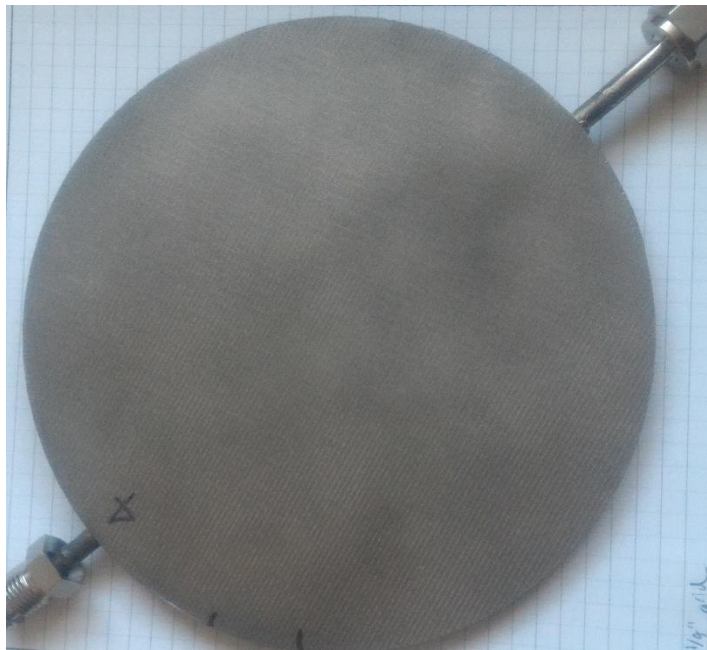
As-received image of Part #4. Adapters were welded to the tube openings before the part was sent to Cal Poly, presumably for leak testing.
